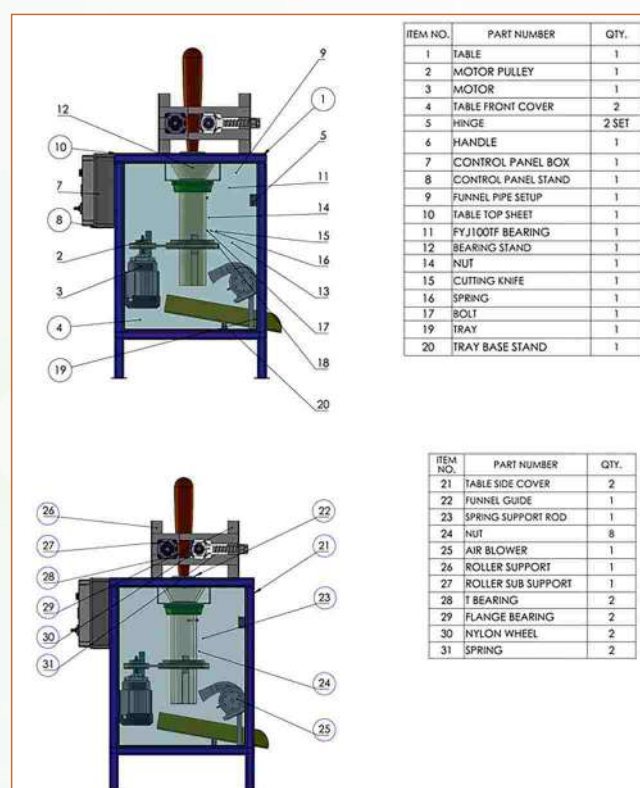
Isometric view of the continuous low cost cassava peeling machine with detailed assembly parts
